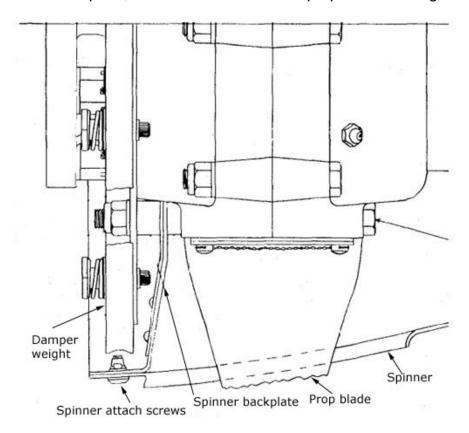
Propeller and vibration damper assembly. Note the location of the spinner attachment screws and how close the ends of the spinner attachment screws are to the damper weight.
